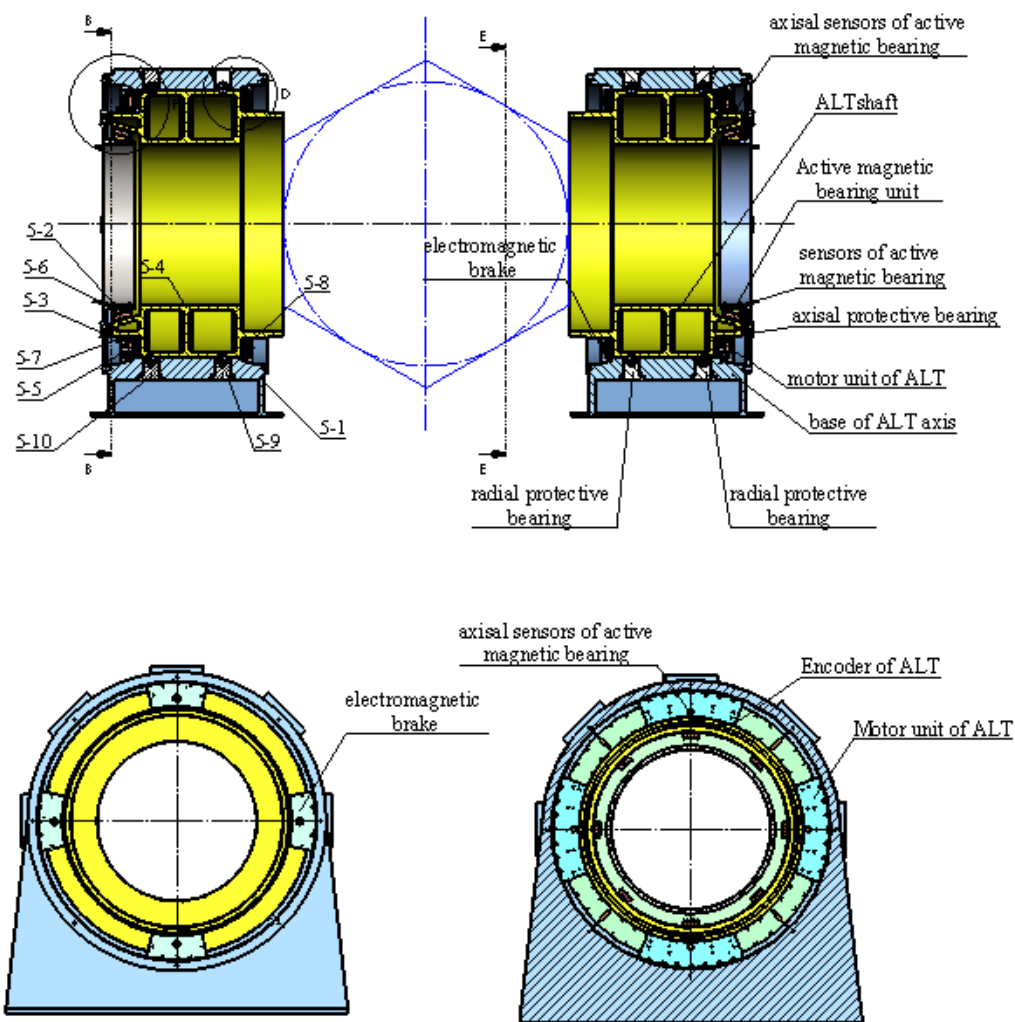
Altitude drives and bearings systems based on conical active bias magnetic suspension support integrated with disk direct drive motor
